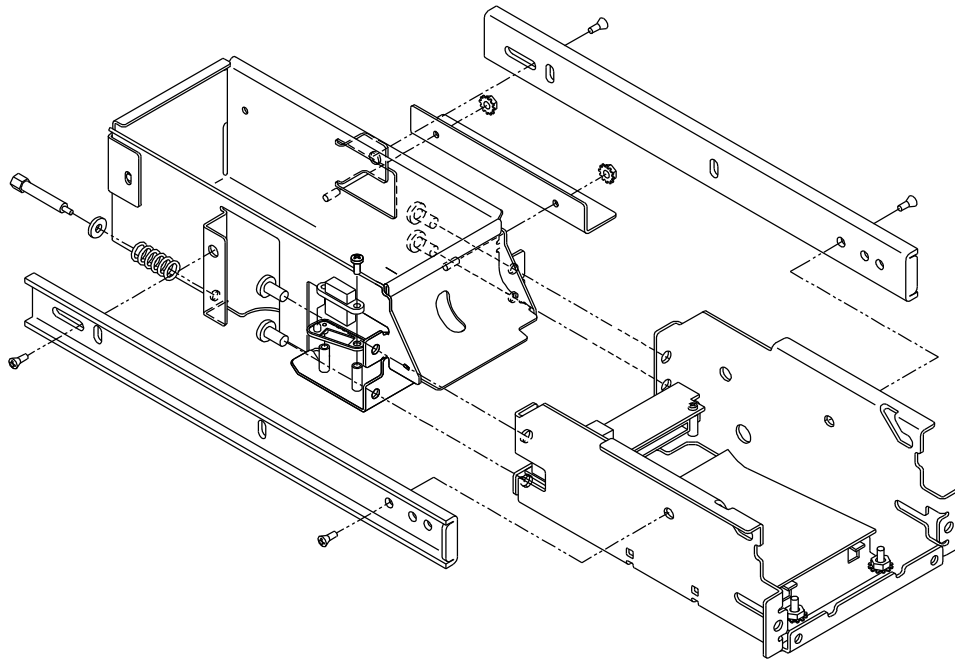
Removing the Ticket Supply Box from the Main Chassis Assembly
